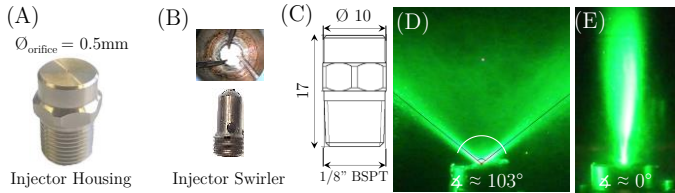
A) FUEL INJECTOR HOUSING; B) INJECTOR SWIRLER, C) INJECTOR DIMENSIONS, SPRAY ANGLE IMAGES OF D) PRESSURE-SWIRL AND E) PLAIN-ORIFICE INJECTOR
